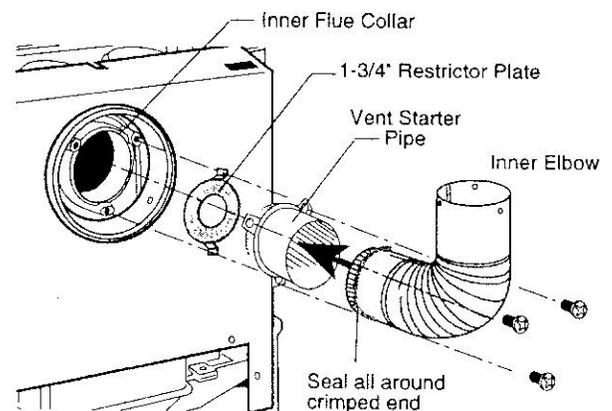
Install Restrictor Plate and Starter Pipe/ Inner Elbow assembly.
